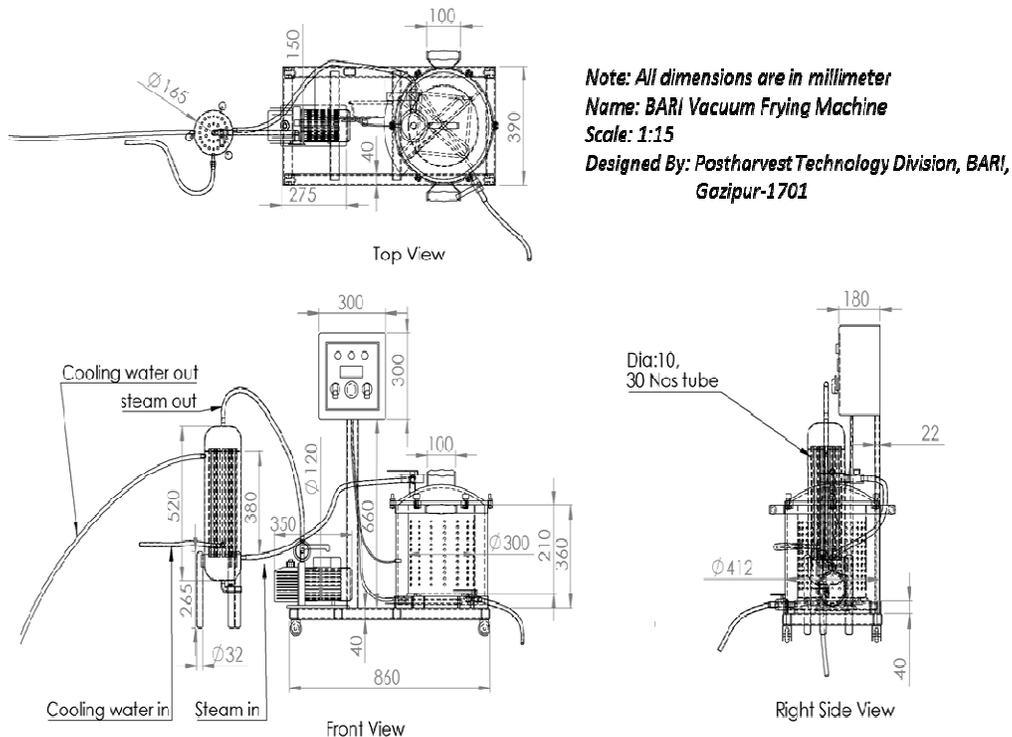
Schematic view of the simplified design BARI Vacuum frying machine.
